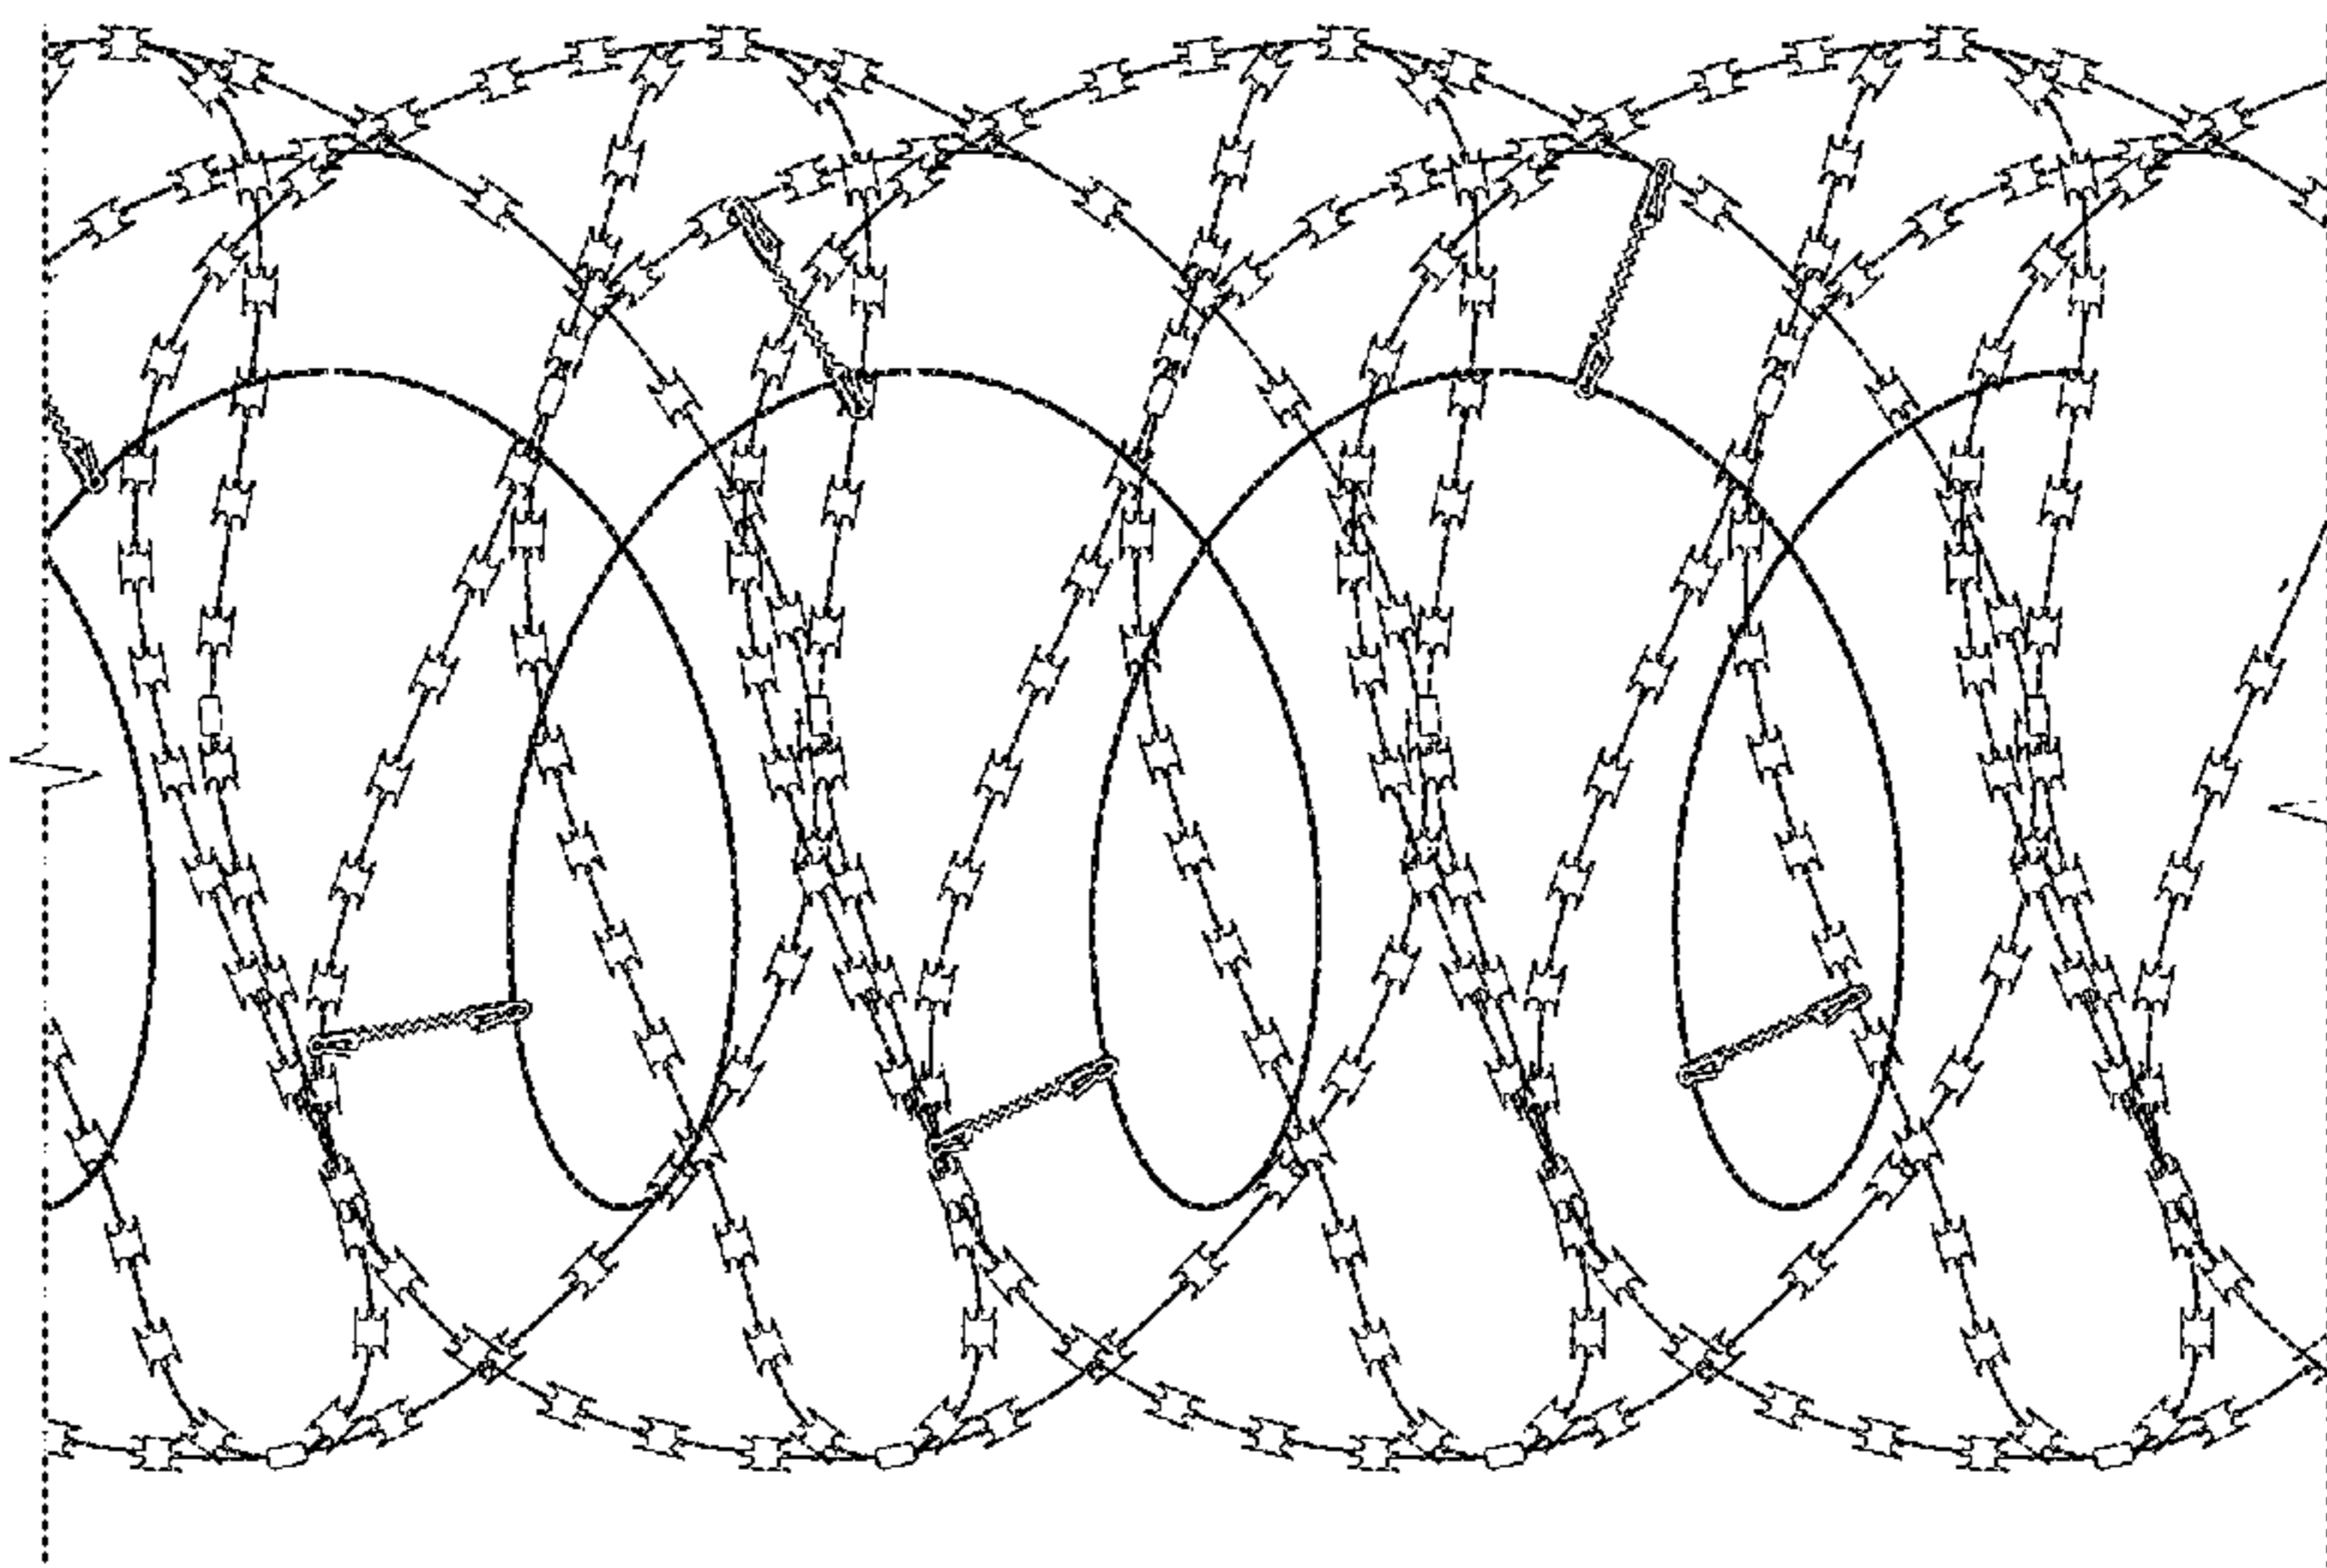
is a perspective view of an electric coil fence assembly showing my new design; FIG. 2 is a side view thereof, the opposing side being identical to this view; FIG. 3 is an end view of the electric coil fence assembly shown in FIG. 1, the opposing end being identical; and, FIG. 4 is an enlarged view of an insulator shown in FIG. 2. The broken lines in FIGS. 1 and 2 depict the bounds of the Claim that form no part of the claimed design. The broken lines shown by the rectangle depicted as IV in FIG. 2 depict the limits of the enlarged area that forms no part of the claimed design.
